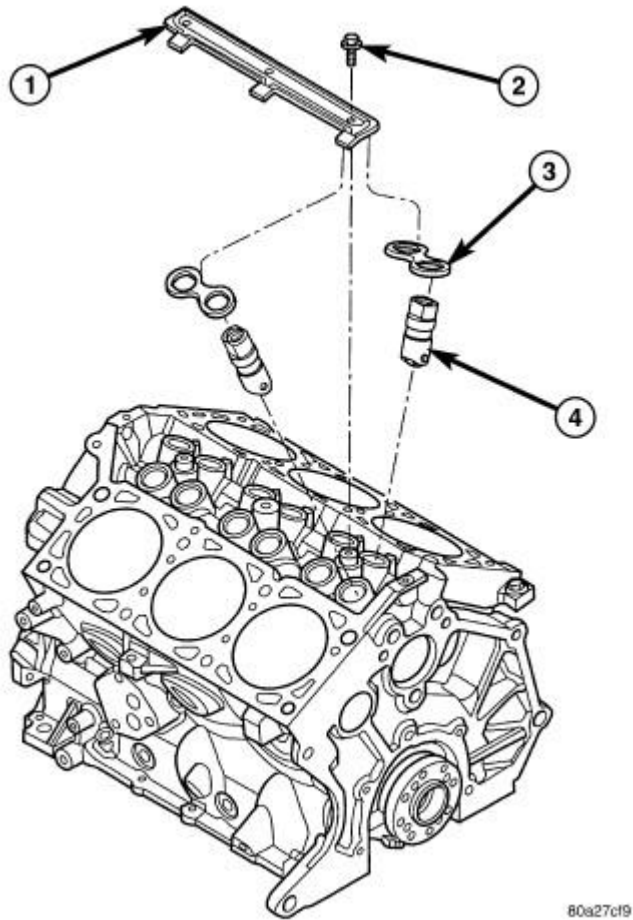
Yoke Retainer, Bolt, Aligning Yoke & Hydraulic Lifter
